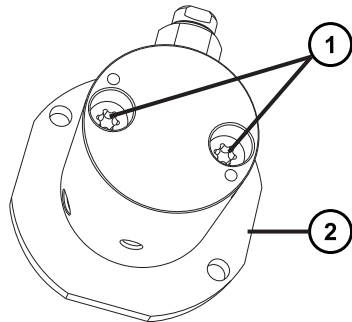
Round side of support plate oriented toward bottom side of pump head
